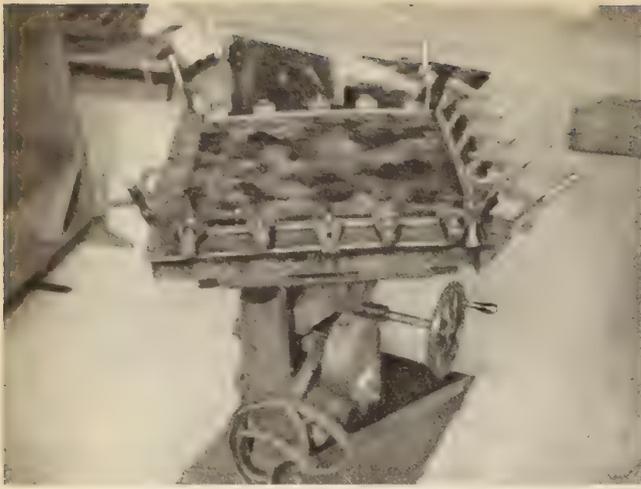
Note prebending induced in plate during welding of strip to edges of plate.
